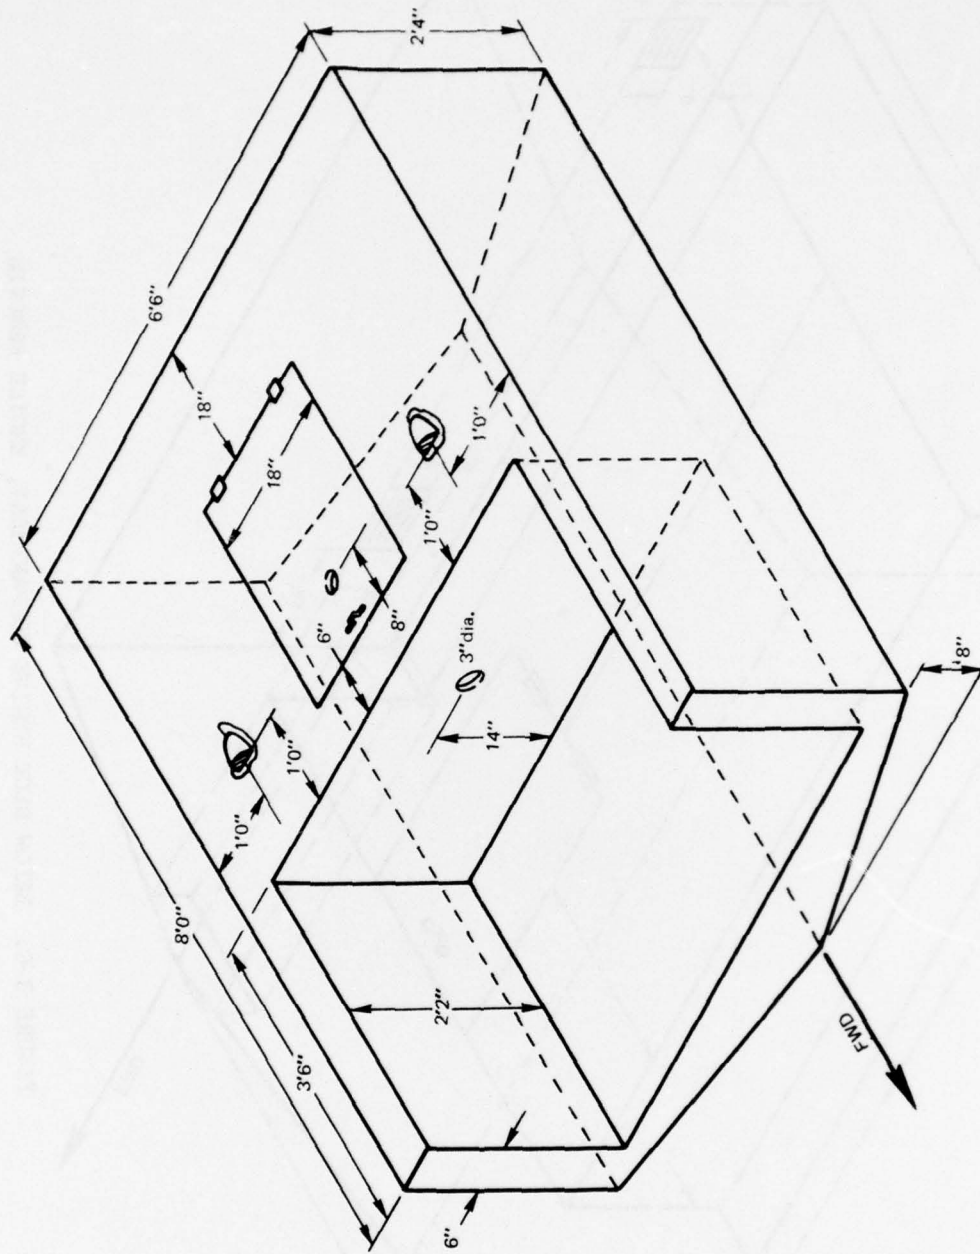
B. INBOARD/OUTDRIVE ACROSS THE STERN ENGINE COMPARTMENT, ENGINE REMOVED
